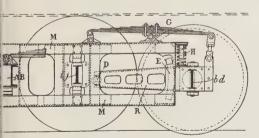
Half elevation of a Dunlop-Fouga truck.
